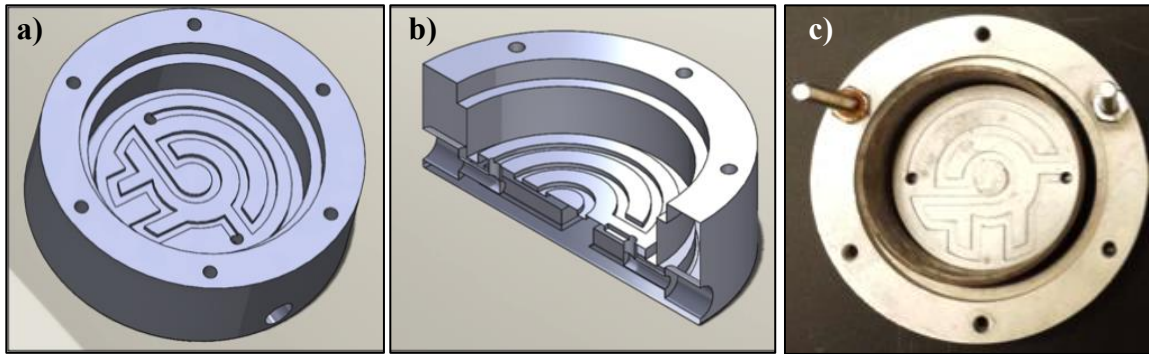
ATX Cell base design details: a) 3D view of base, b) Cross section showing grooves, inlet, and outlet connections. c) Picture of the base.
